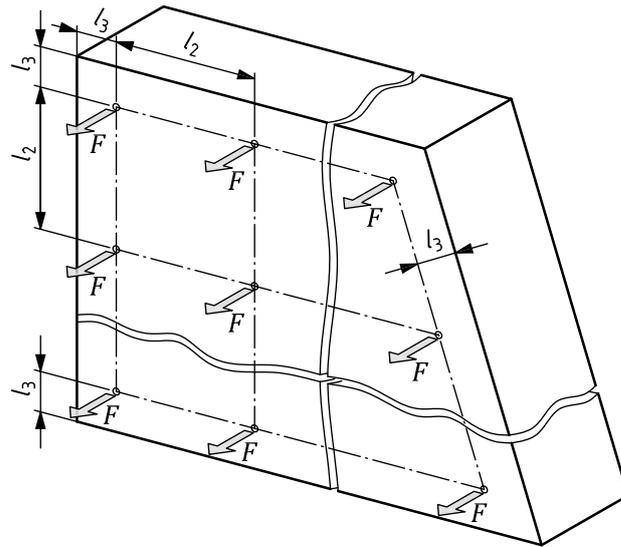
Examples of test location and direction of the force at the surface of a bumper with both dimensions exceeding 150 mm for two different machines designs as per [Figure 1](#)
